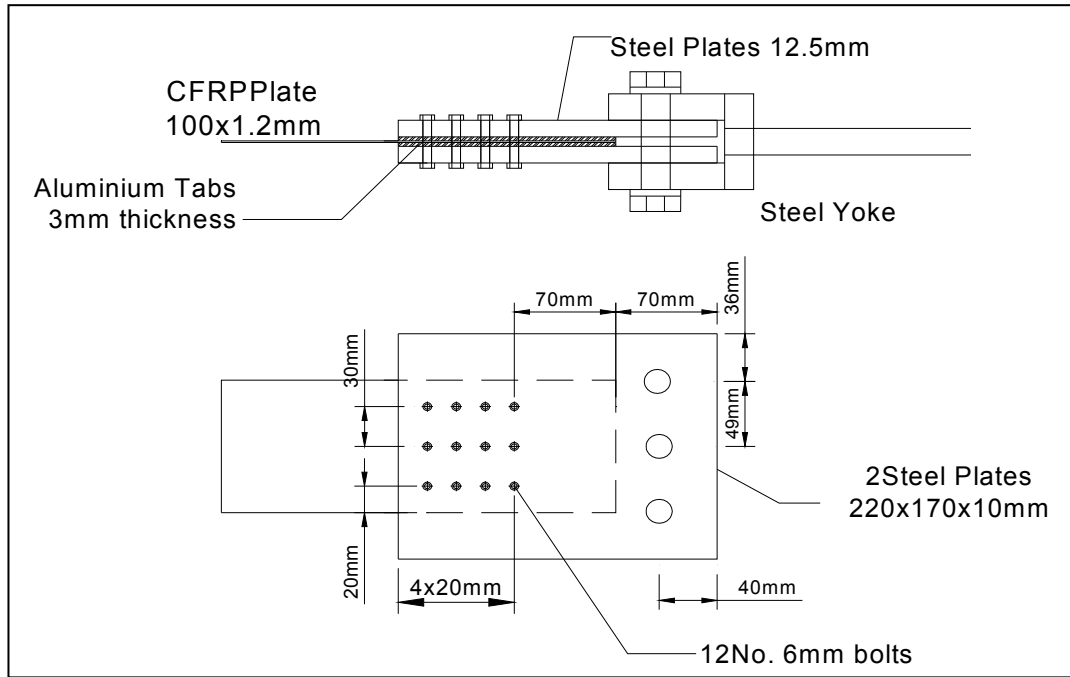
Plate end assembly according to Quantrill and Hollaway [5].
